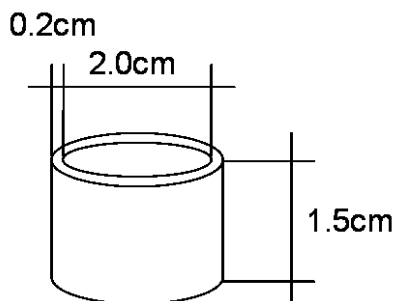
Schematic drawing with dimensions of the piezo ceramic element used for HADES sensors.
